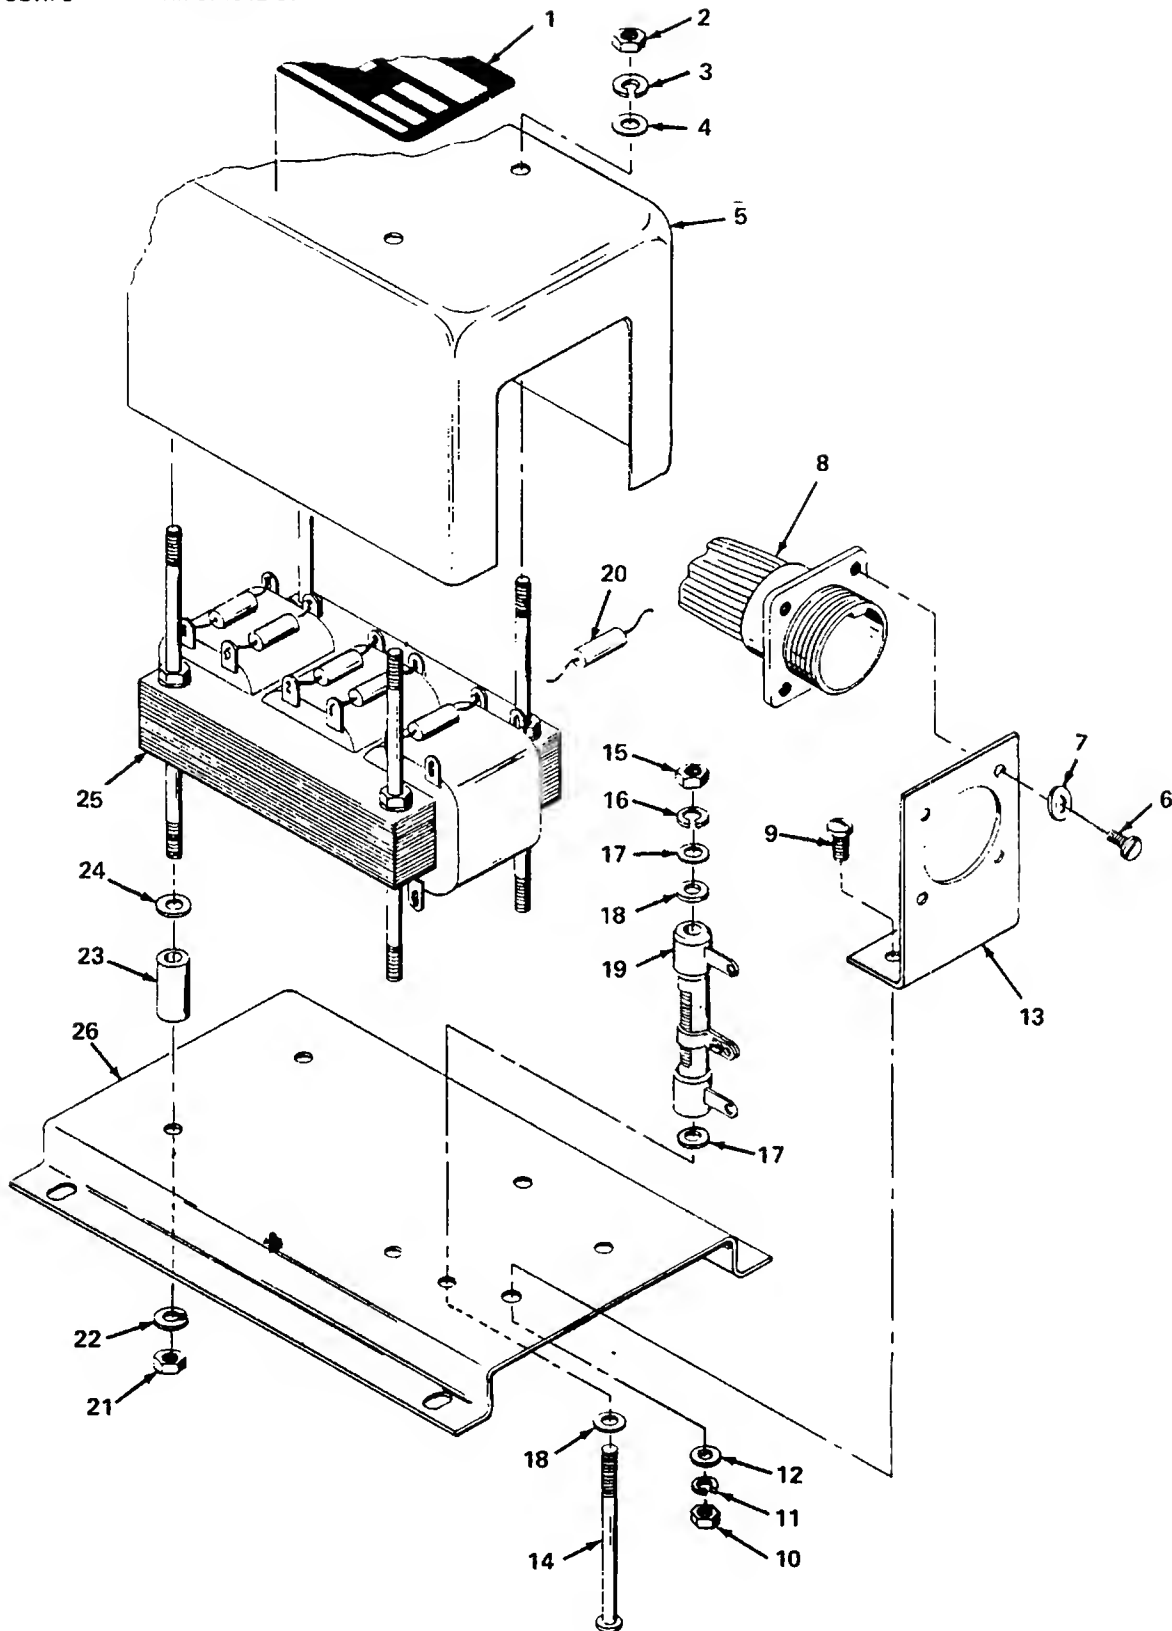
Load Measurement Unit A8, Exploded View (Sheet 1 of 2)
